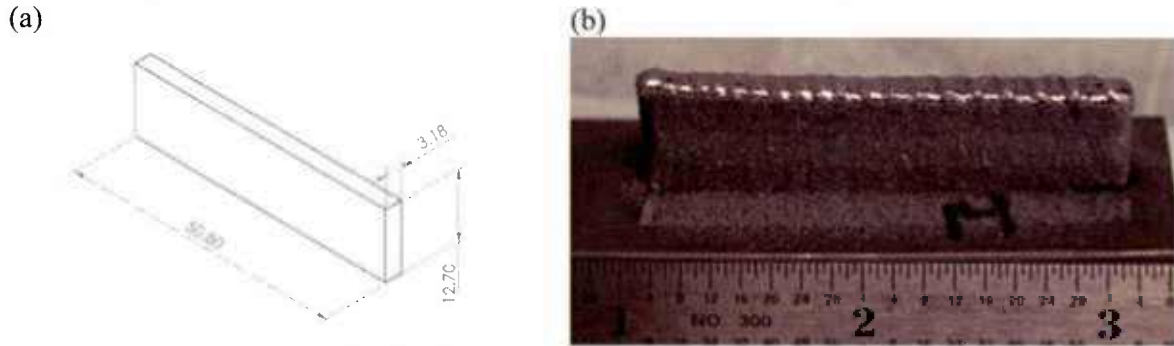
(a) Part geometry with dimensions in millimeters. (b) Image of deposited part.
